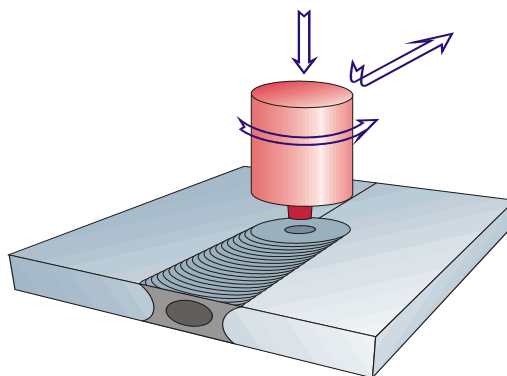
Schematic diagram of the friction stir welding process when joining two metal sheets. The two abutting workpieces are joined by the rotating tool that comprises of pin (lower part) and shoulder (upper part). Travel direction, rotation direction, and down force are indicated by arrows.
